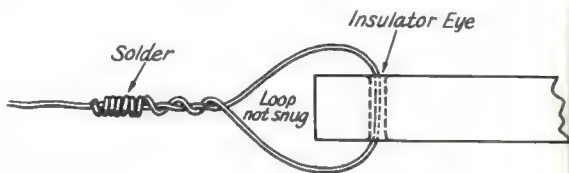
In fastening antenna wire to an insulator, the wire loop should not be made too snug. After completion, solder should be flowed into the turns. When the joint has cooled completely, it should be sprayed with acrylic.
